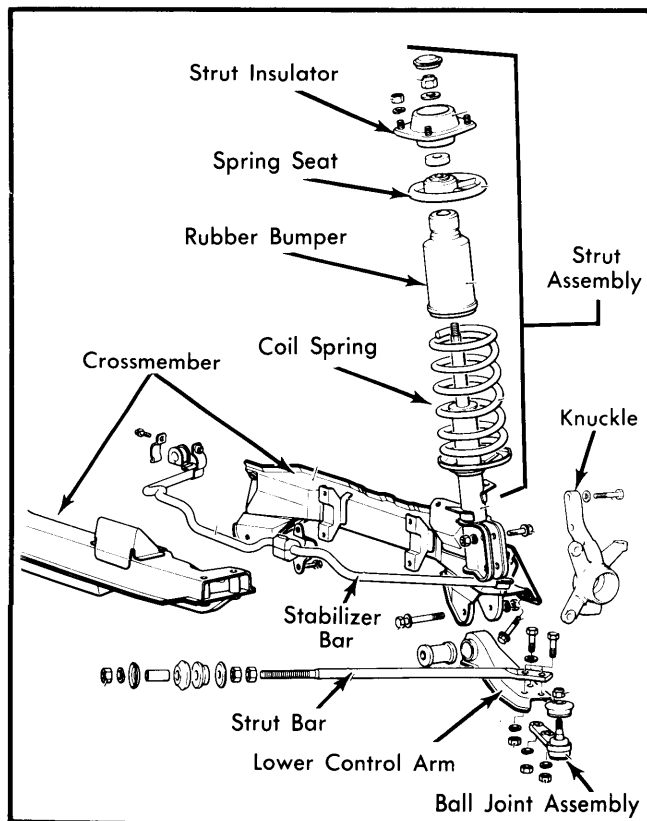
Exploded View of Front Suspension (Front-Wheel Drive Models)
